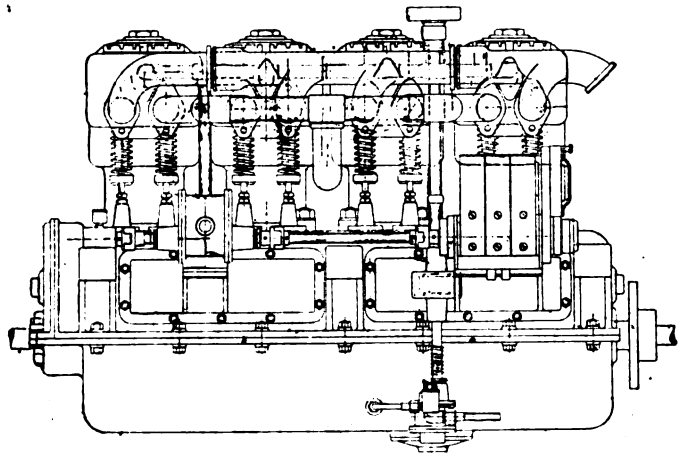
The Martin and Jellicoe 24-28-h.p. Engine.
